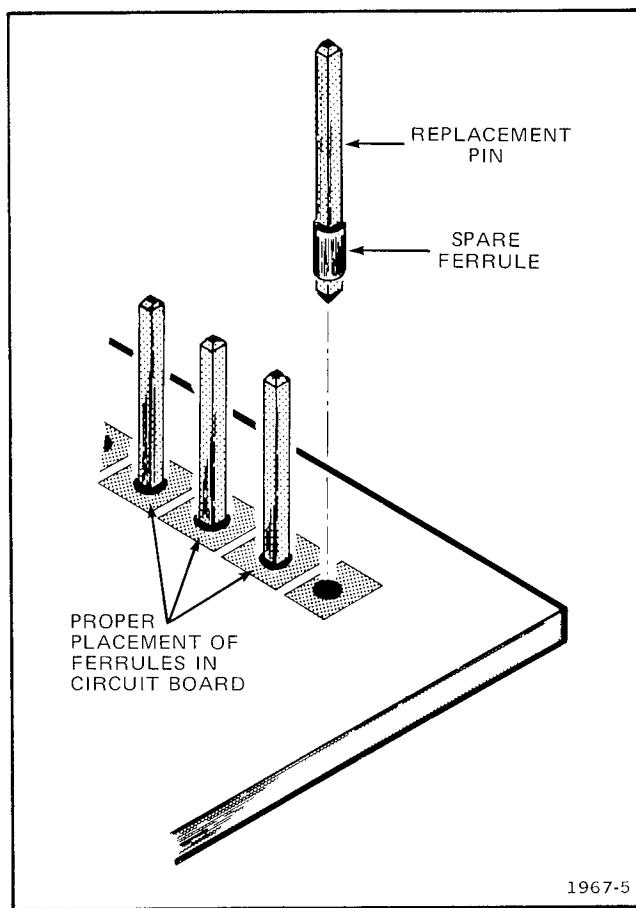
Exploded view of circuit board pin and ferrule.
